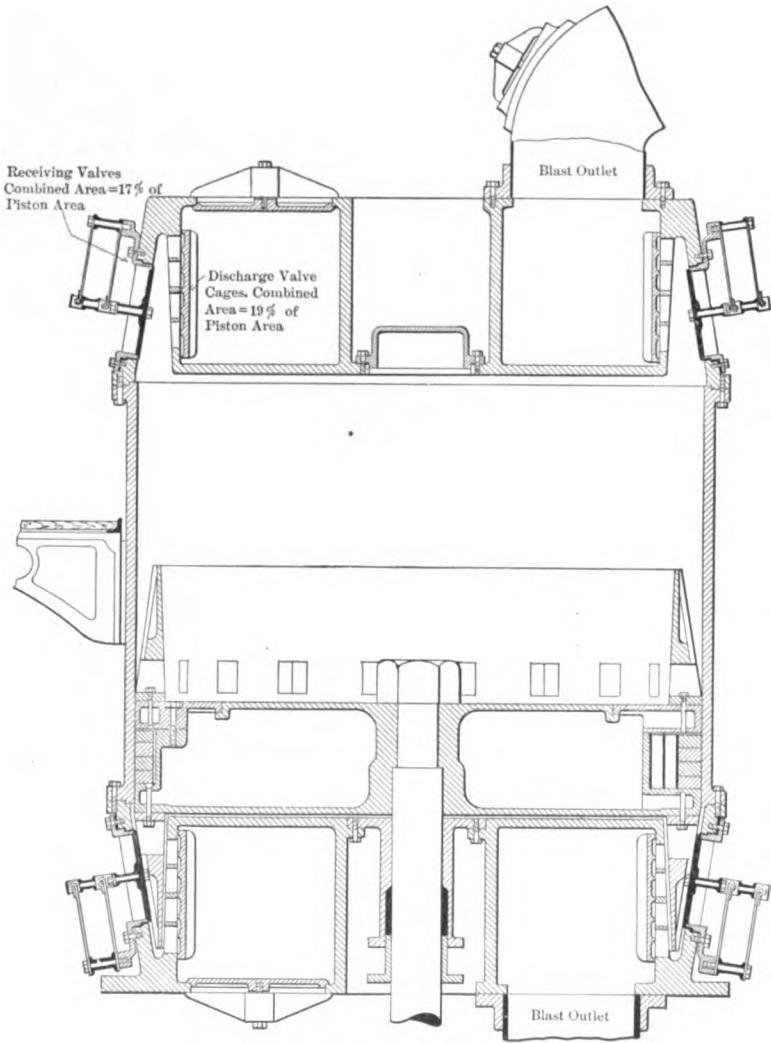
ENGINE WITH AUTOMATIC INLET AND OUTLET VALVES (WEIMER)
